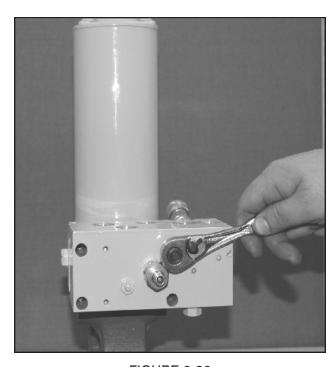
Torque the bolts to 100-125 in. lbs. using a 1/4" hex key or Allen Socket.
